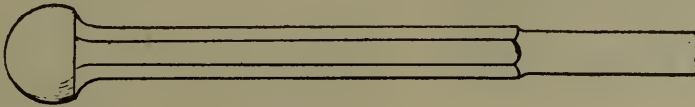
Special tool used with pneumatic hammer for scaling condenser tubes.
